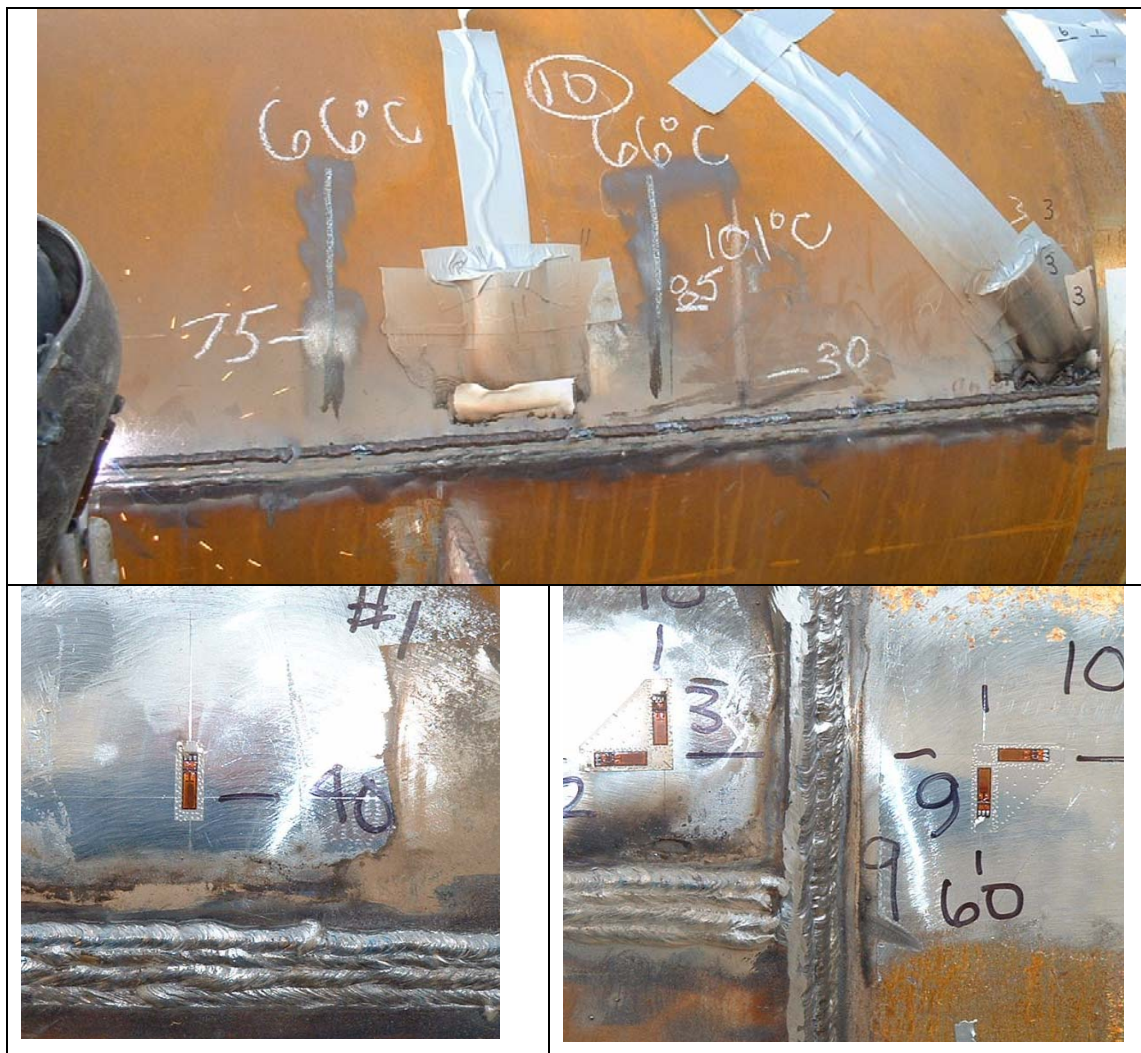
Strain Gauges after Welding. Top photo shows the damage to the cloth tape after welding, and the lower photographs show the gauge with protection removed.
